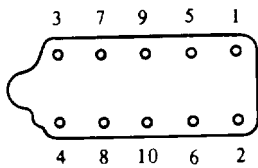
Cylinder Head Bolt Loosening Sequence
